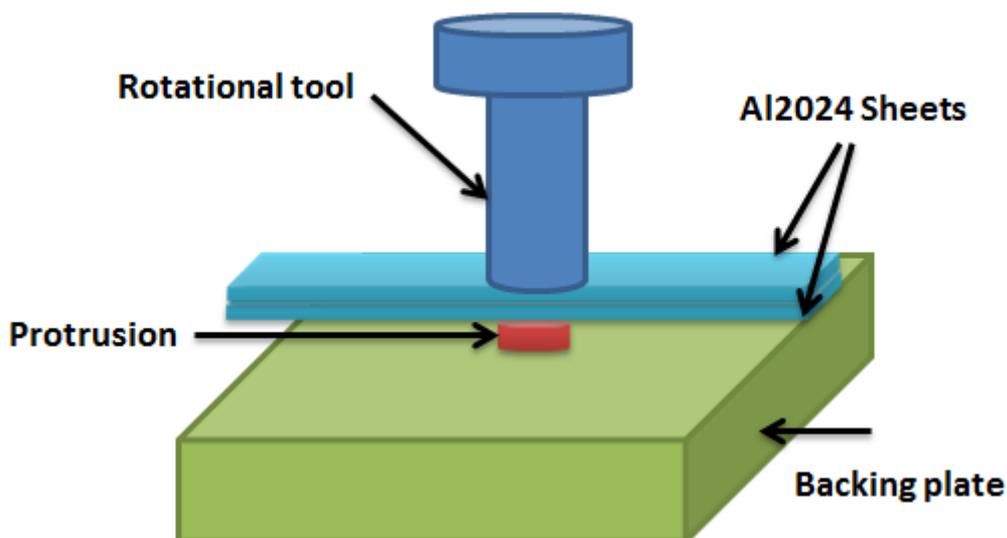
Schematic of rotational tool, welding plates, protrusion and backing plate in this investigation
